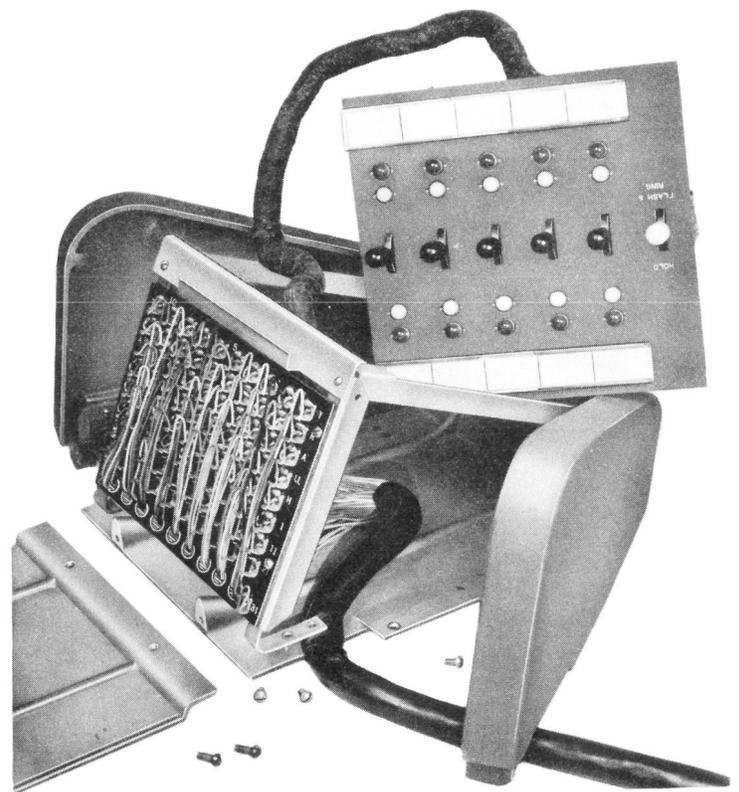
Assembling Key Unit in 700-type Apparatus Case
